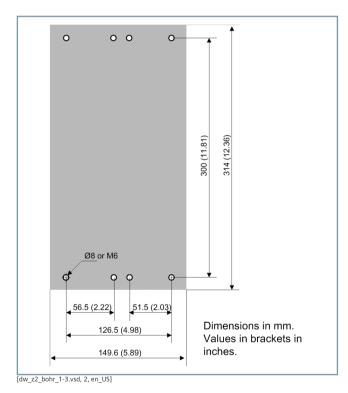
/28 Drilling Pattern of a 1/3 Surface-Mounted Device – 2nd Device Row
